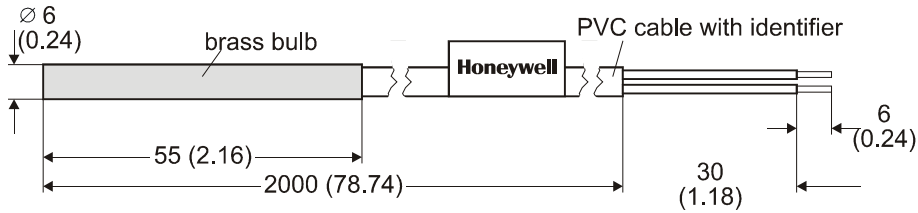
Dimensions of the cable-type bulb sensor in mm (inches)
